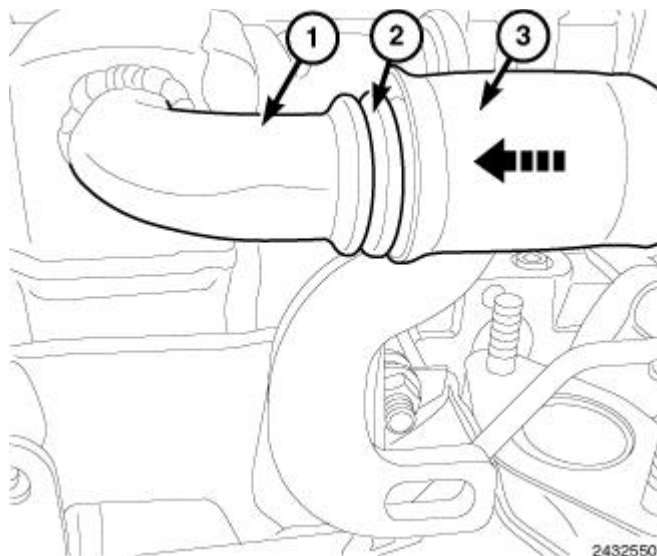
Identifying EGR Cooler, O-ring & Forward Coolant Tube
